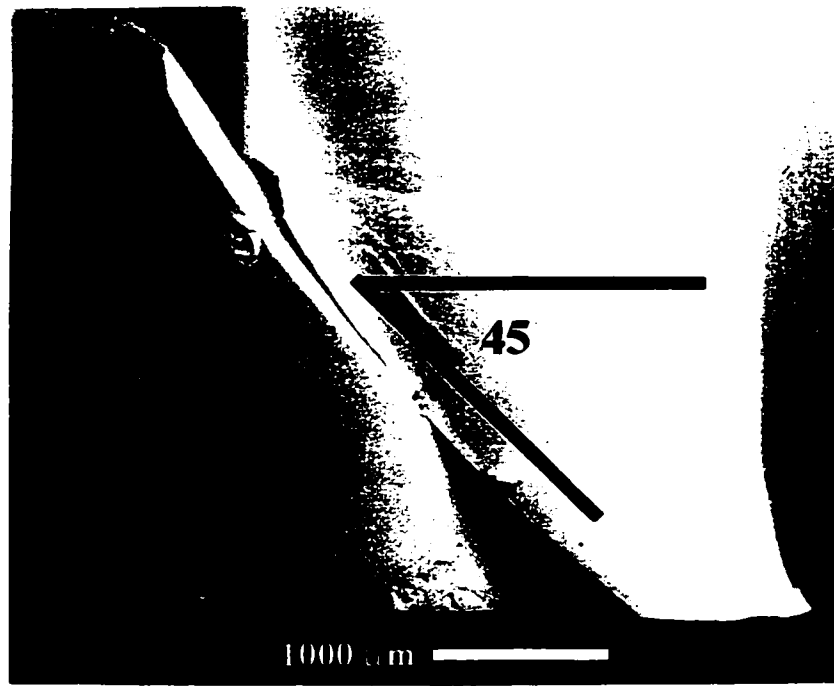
Vitreloy® 106 compression sample, which shows the 45 degree shear band failure typical of metallic glass.
